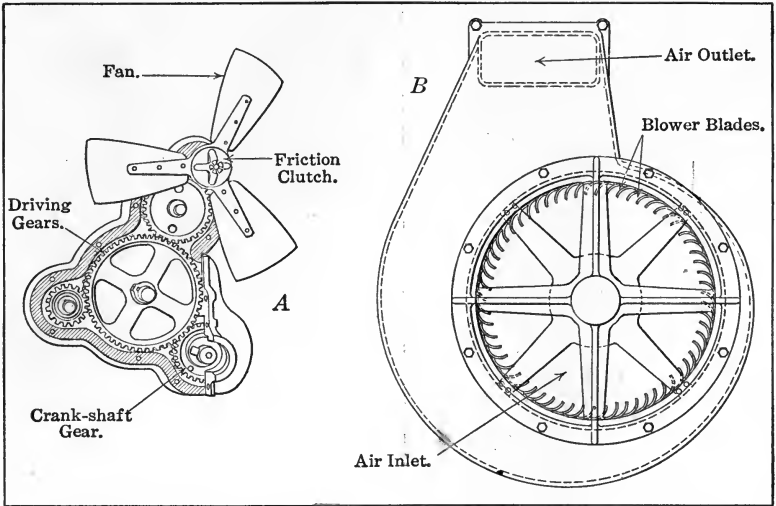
Two Forms of Positive Air Fans Used in Automobile-Cooling Systems. A—Gear-Driven, Three-Blade Fan Utilized to Draw Air Through Winton Radiator. B—Blower Member Used on Kelly Air-Jacketed Cylinder Motor.
